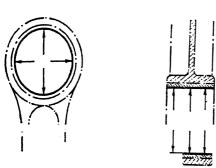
Showing points to check wrist pin and gudgeon pin bush bores.
